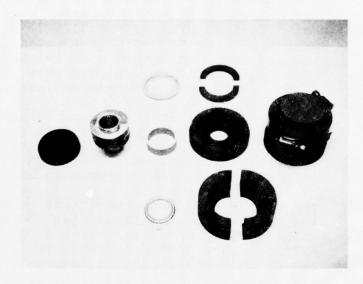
Revised Cathode Heat-Pipe Brazing Fixture: The cathode heat-pipe brazing fixture was modified to add a weight to the flange soldered on top of the ceramic. Since the flange diameter is less than the fin diameter of the heat-pipe, the weight is split into two halves so that it can be removed after brazing. A new weight was also designed for weighting the heat-pipe into the fixture.
